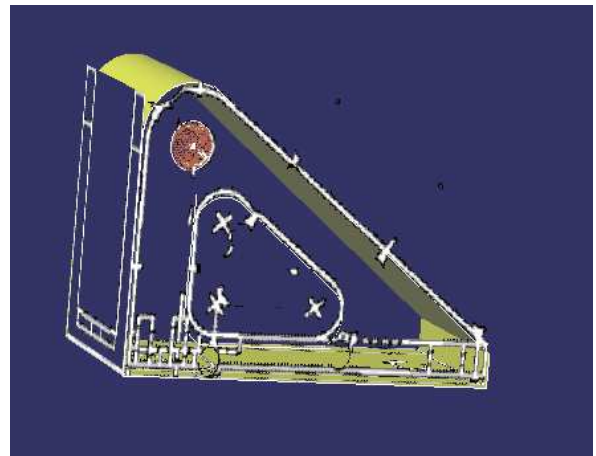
2D views from the engineering drawing superimposed on the 3D model.
